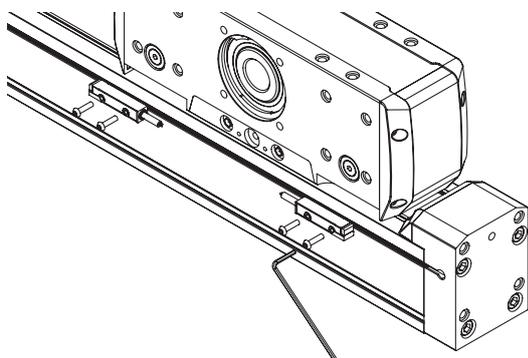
Mounting the limit switches: HC-B (all sizes)
